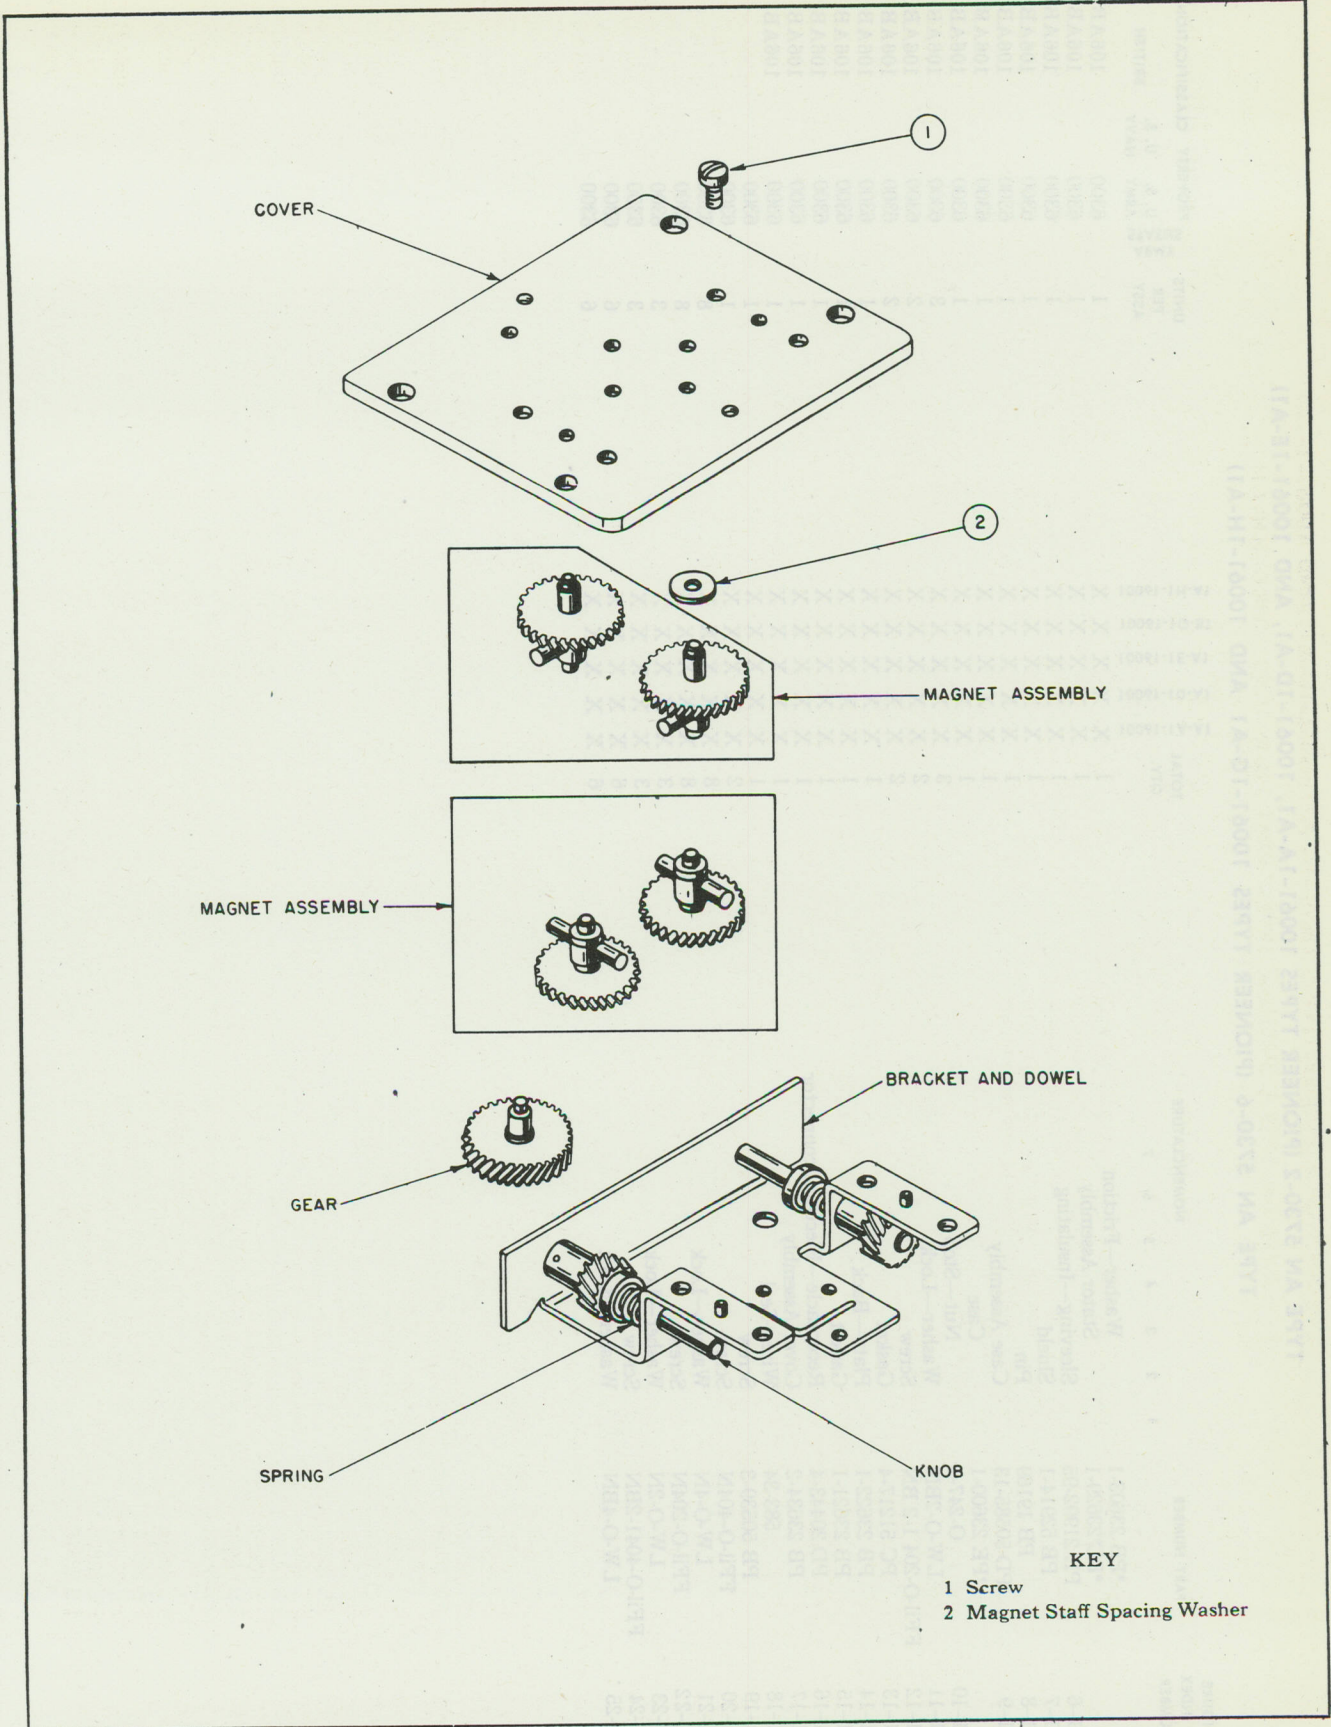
Exploded View Drawing—Compensator Assembly—Transmitter—Type AN 5730-3
